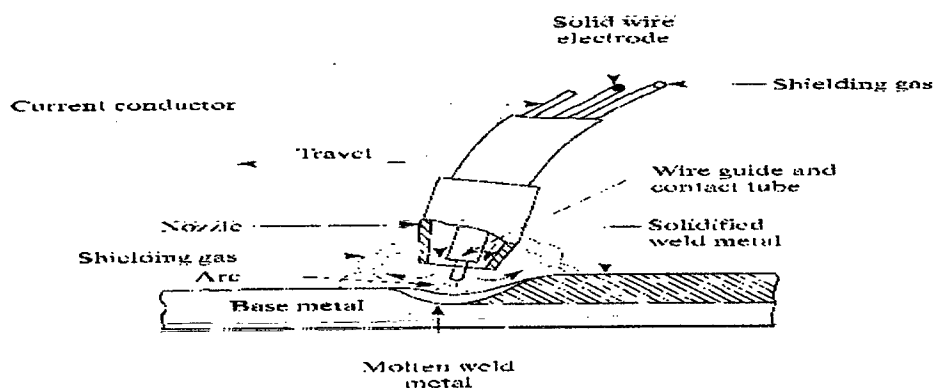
Schematic illustration of the gas metal arc welding process (Kalpakjian 2001)
